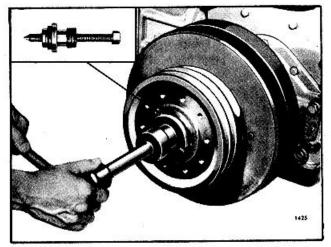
Removing Rubber Mounted Pulley from Crankshaft using Tool J 5356
